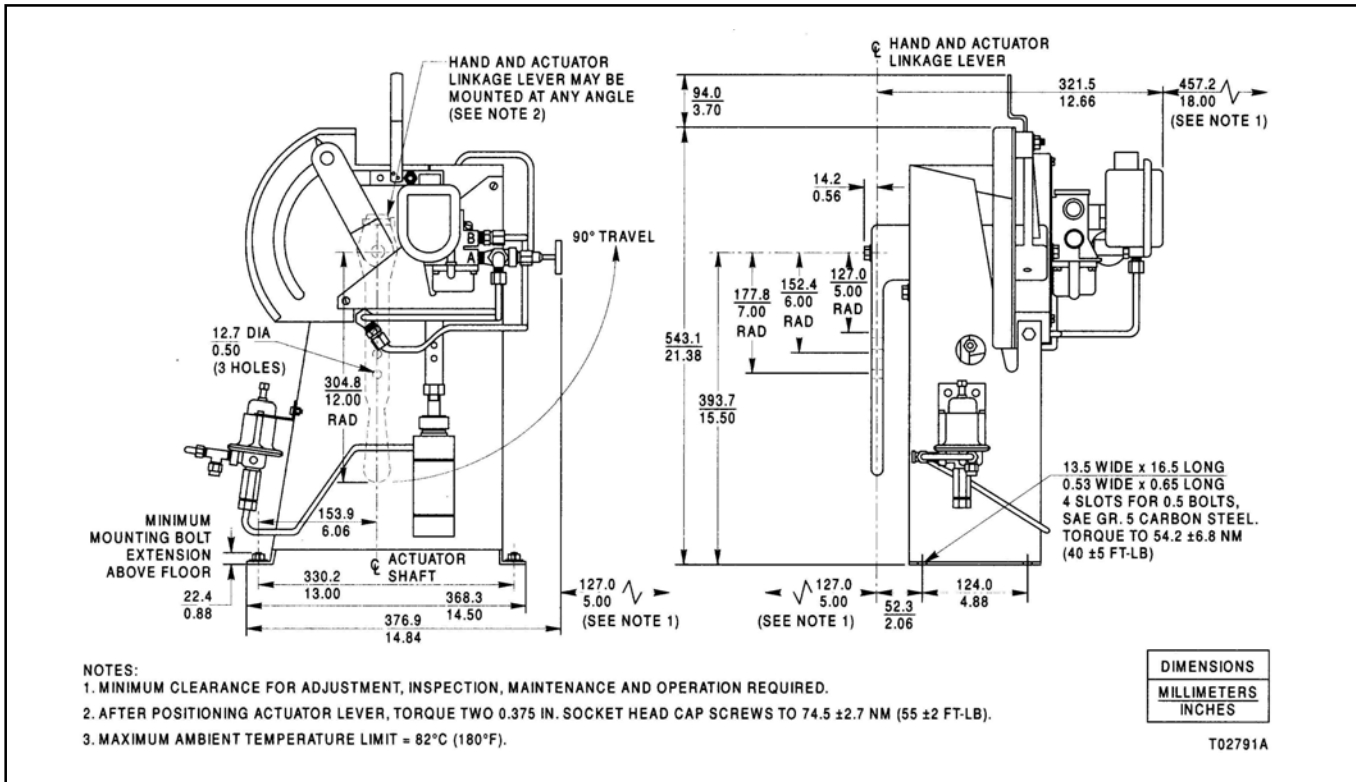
Type UP1 Actuator with Solenoid Valve and Air Failure Lock
